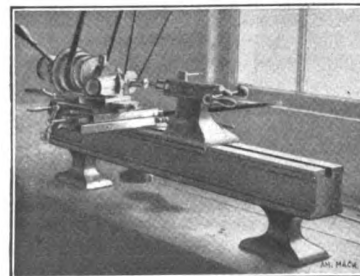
PRECISION LATHE FOR GRINDING NEEDLE-VALVE POINTS
